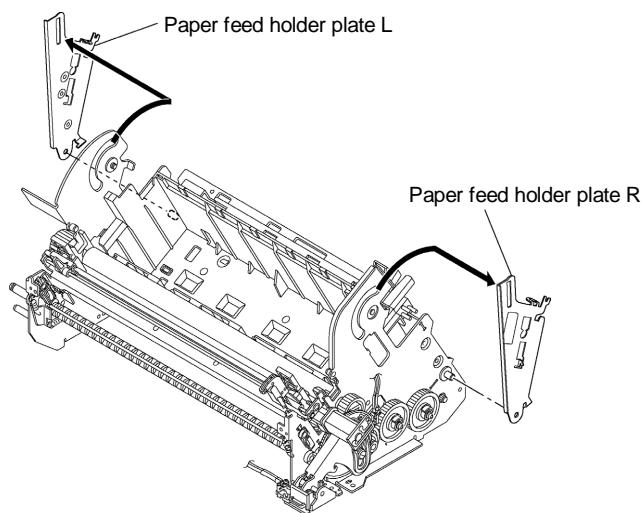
Removing the Paper Feed Holder Plates L/R
